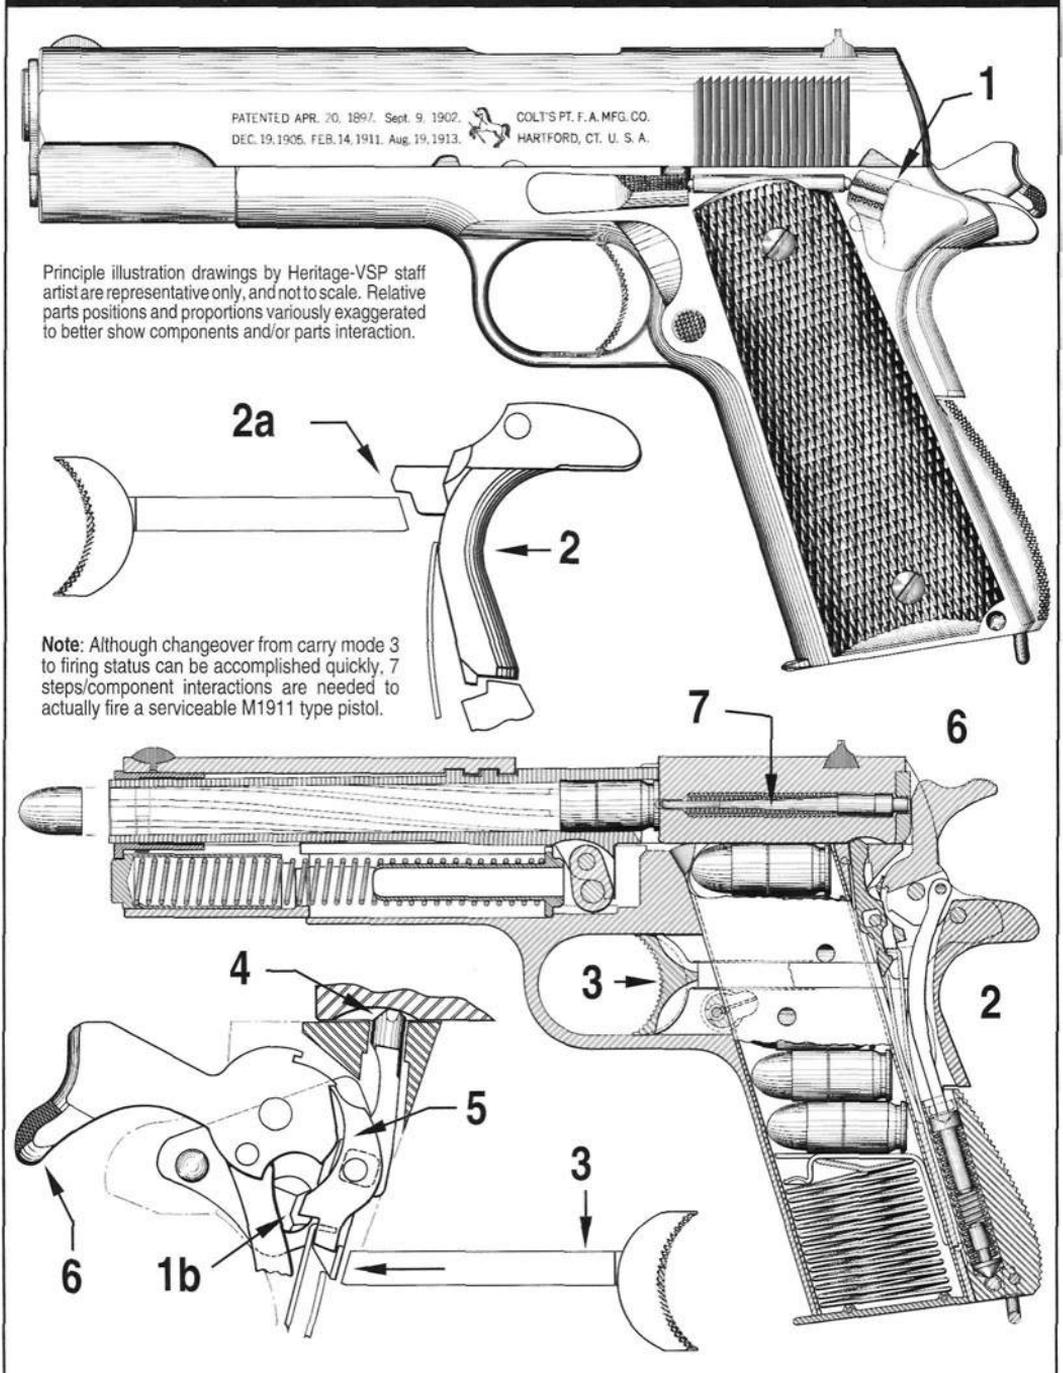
Sectional illustration depicts an M1911A1 Pistol in Ready Storage Mode 2- The pistol is fully assembled, unloaded, lightly oiled and wiped dry, and hammer not cocked. In this mode, the pistol may be stored with loaded magazine(s), or loaded magazine(s) stored separately but readily accessible to the owner of the pistol. See warning on page 33. Carry Mode 1- The pistol is holstered unloaded with or without an empty magazine, hammer not cocked. Loaded magazine(s) stored in pouches on pistol belt.
